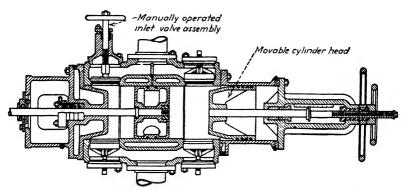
Hand-operated inlet valve and adjustable cylinder head.
